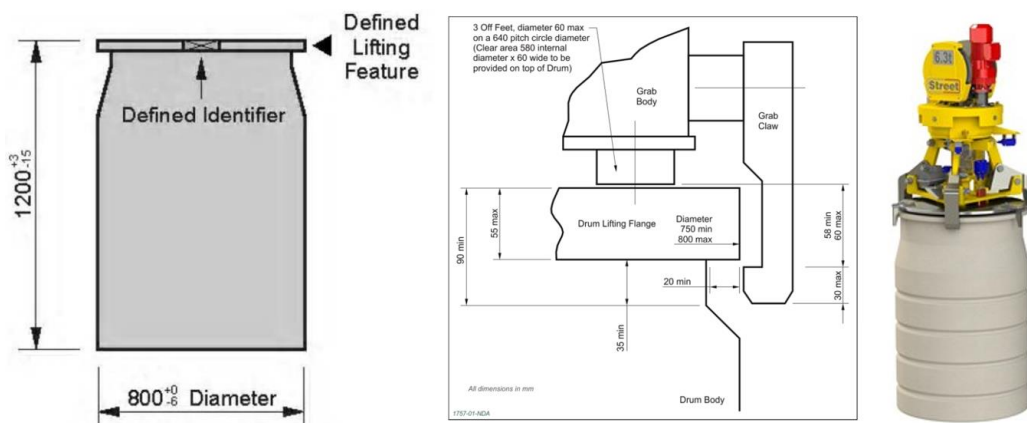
(Left) Standard ILW 500 L drum overall external dimensions and identifier [15]. Centre- Standard RWM 500 L drum lifting features layouts [10]. (Right) Dounreay drum lifting crane assembly [21].
